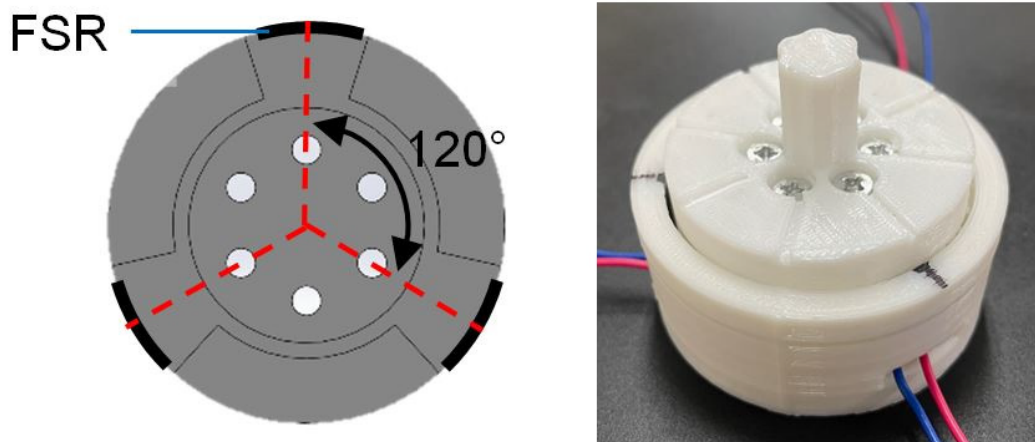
(Left) bottom view of the head, and (right) the completed bi-axial pressure sensor
